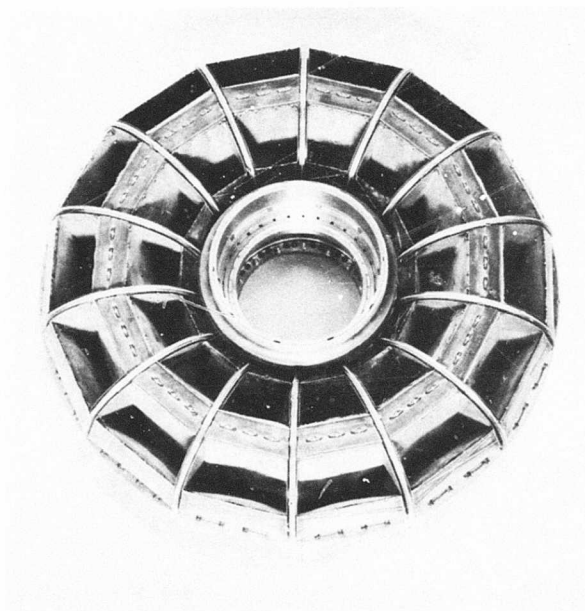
Front View of the Hot Side of the Rotor Assembly.
